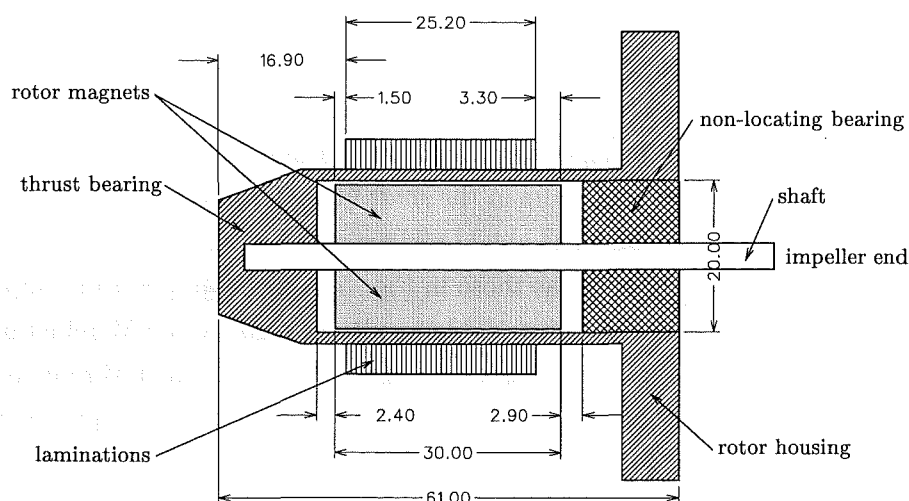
Section through the stator d-axis of the Siemens motor showing the rotor housing, rotor, and stator stack. Dimensions in mm.
